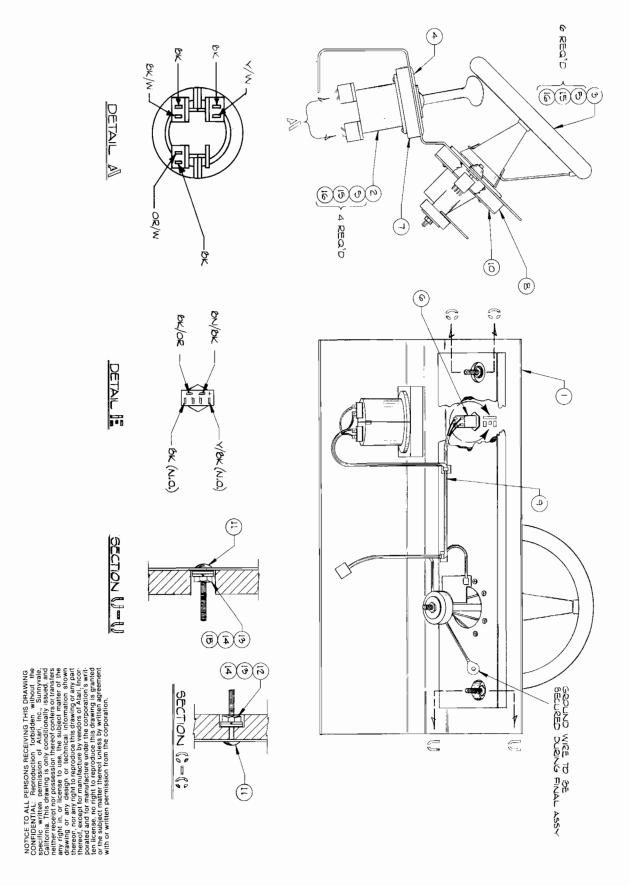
Control Panel Assembly (Graphics) A032834-01 D
